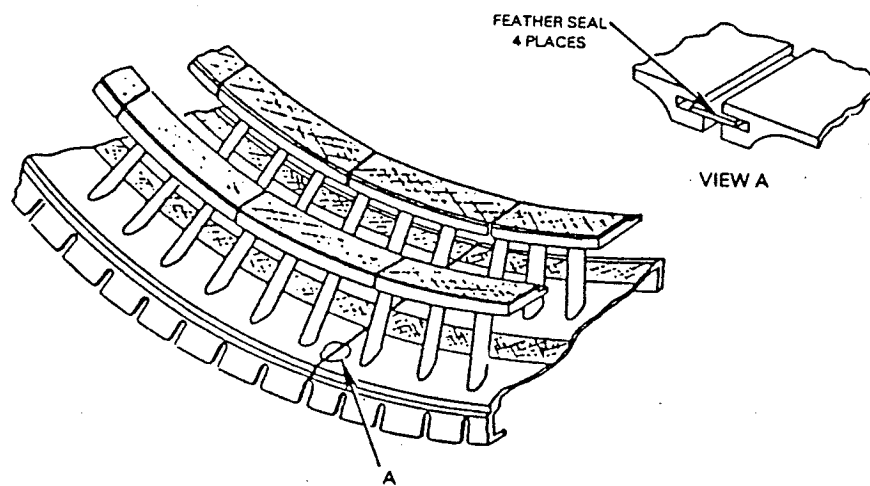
High-Pressure Compressor Rear Stator and Shroud Assembly
